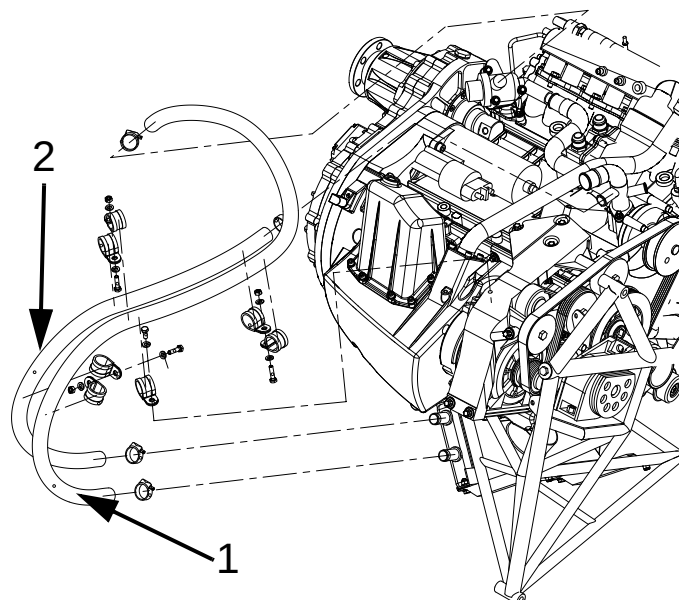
Coolant Hose System (Heat Exchanger) C-172 with TAE 125-01 installation
